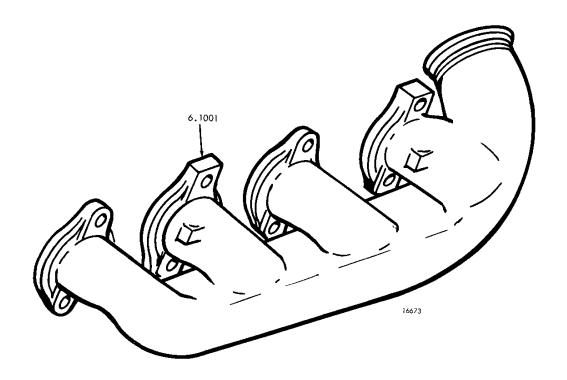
B EXHAUST MANIFOLD (end outlet, left bank)
